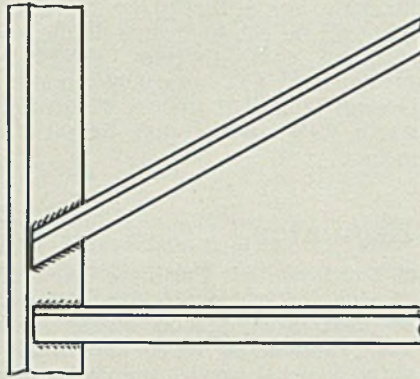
Structural welds in places such as shown here are ideal for alternating-current welding
